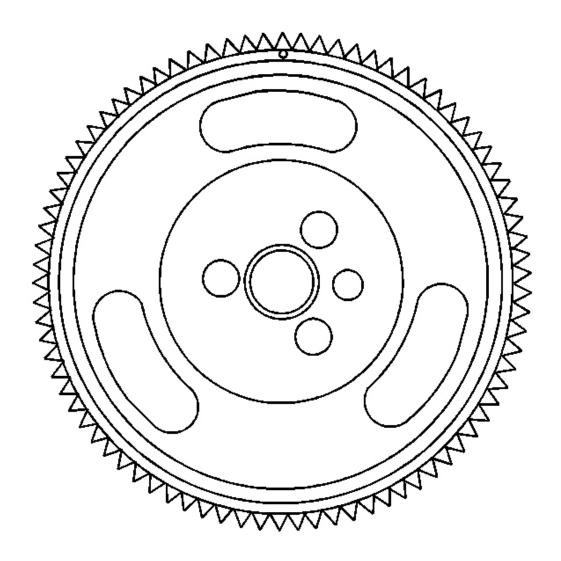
Balance Shaft Drive Gear Camshaft Timing Mark Courtesy of GENERAL MOTORS CORP.
